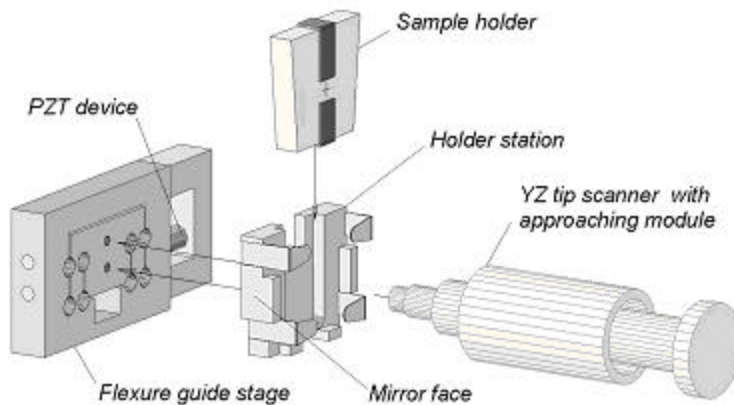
3D Schematic of the measurement stage, sample holder, measurement mirror and STM piezo scanning tube with tip.
